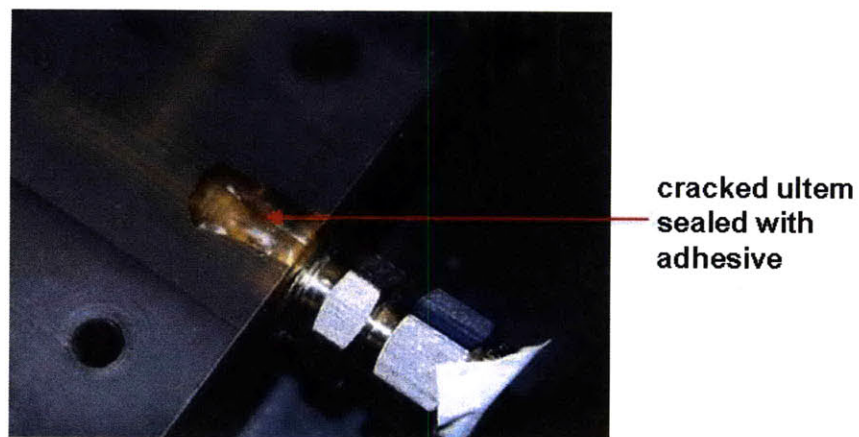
Image of the test section after cracking at inlet fitting due to thermal gradient between incoming 80 °C steam and the external ambient air.
